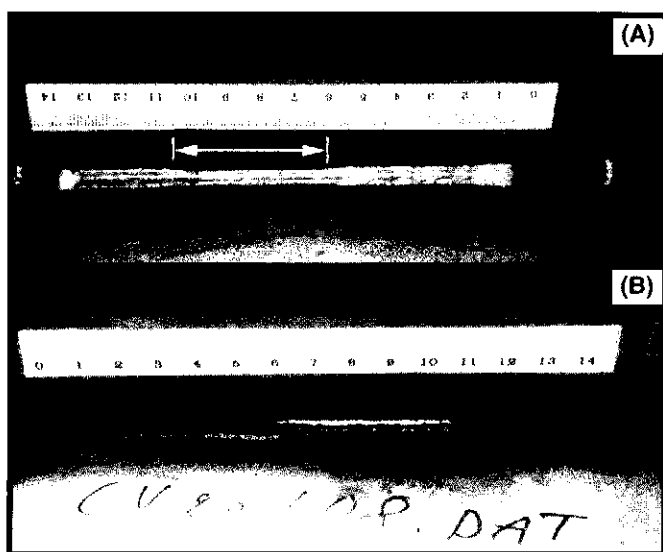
T-joint with step disturbance No. 1. Photo of: A — Front; B — rear side of a welded joint. Note that the weld joint at the front of the T-joint in the interval 6–10.5 cm, along the scale (where the weld joint tapers) deviates from normal weld quality, i.e., the size of the leg length and throat dimension is reduced.
